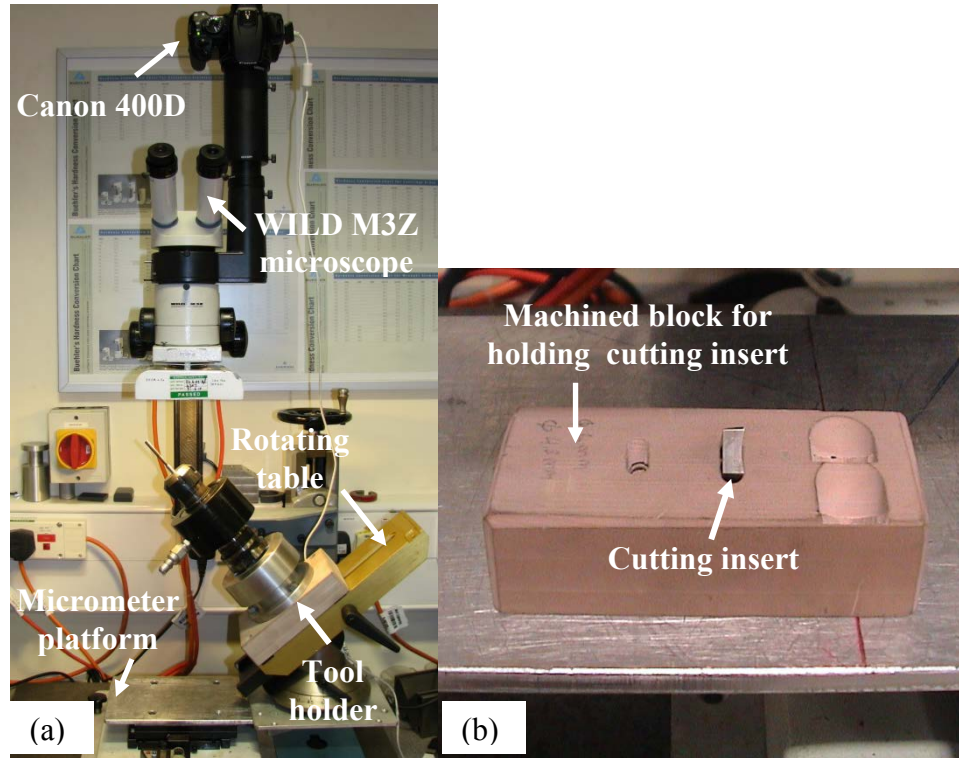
Typical tool flank wear measurement setup for (a) round cutting tools and (b) inserts
